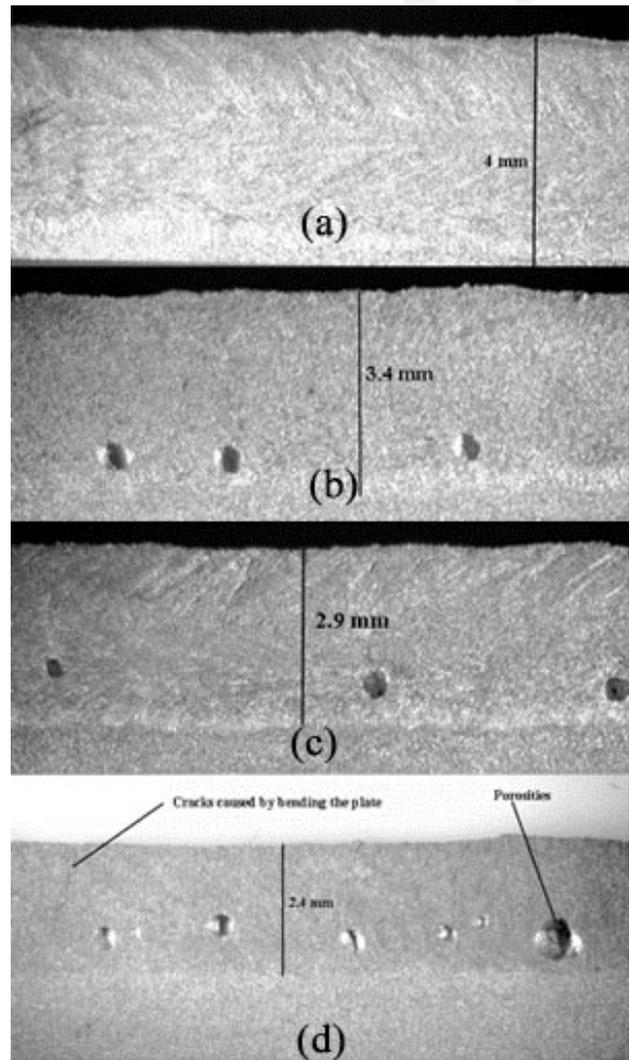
Longitudinal section views of welds for comprehensive examination for porosity: (a) Weld No. 1, (b) Weld No. 2, (c) Weld No. 3, and (d) Weld No. 4.
